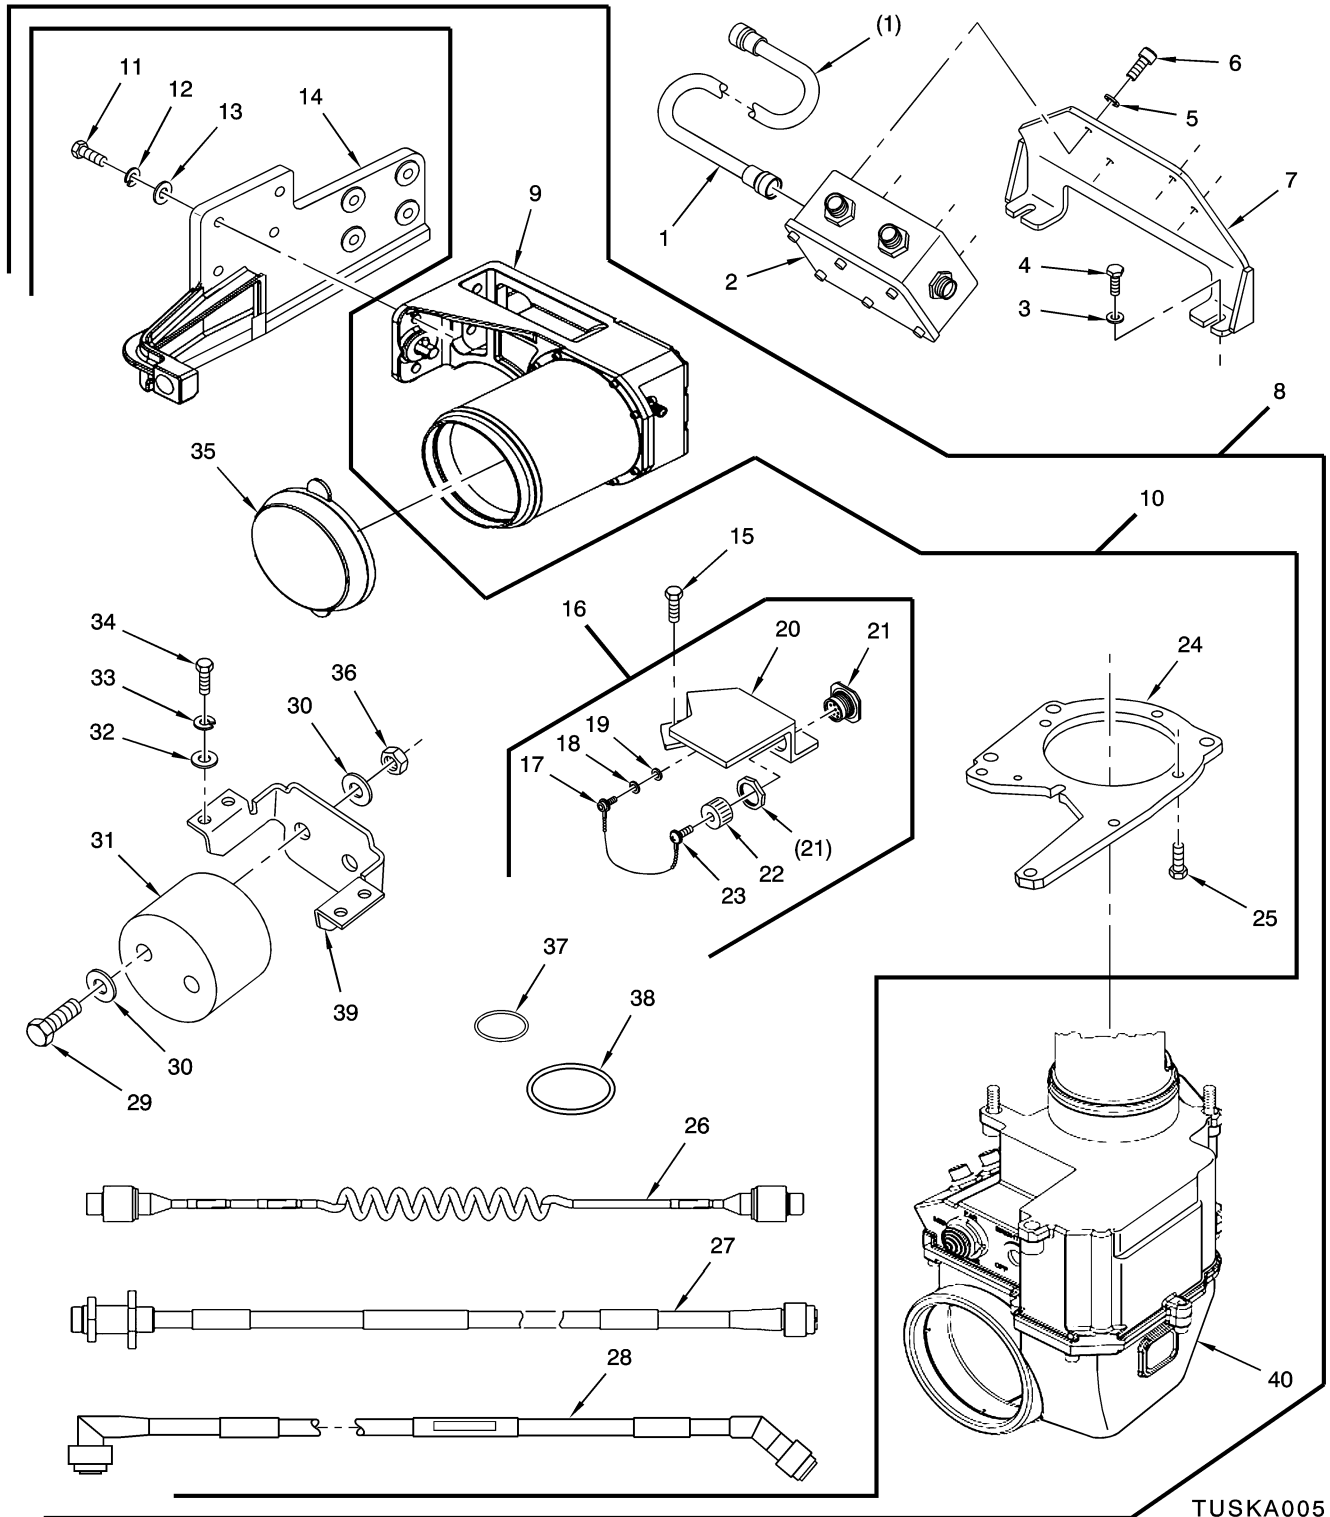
F11. 1W109-EF SPECIAL PURPOSE CABLE ASSEMBLY COMPONENTS (P/N 12473115)
